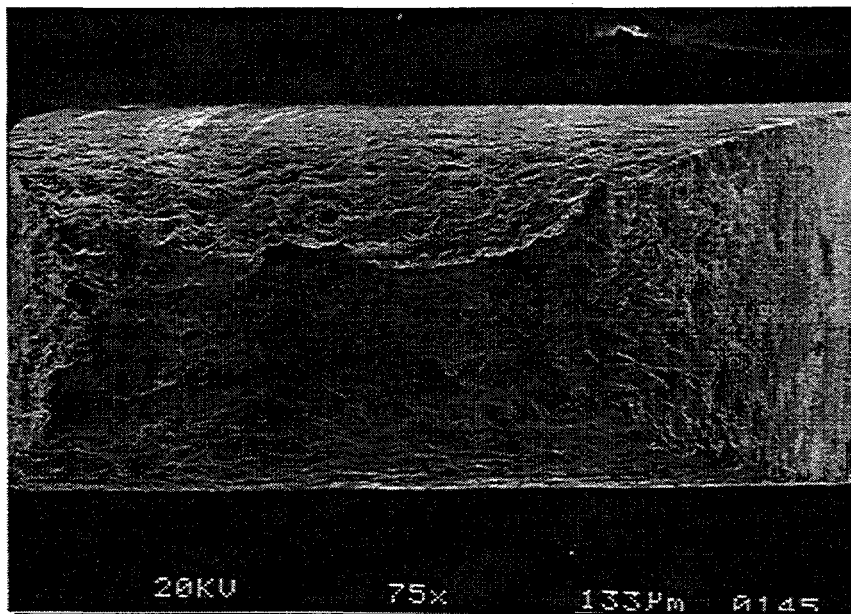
Low magnification image of the fracture surface of a SS-3 sheet tensile specimen. Sample WH05 irradiated in HFBR-V2 to 0.5 dpa at 232°C and tested at room temperature.
